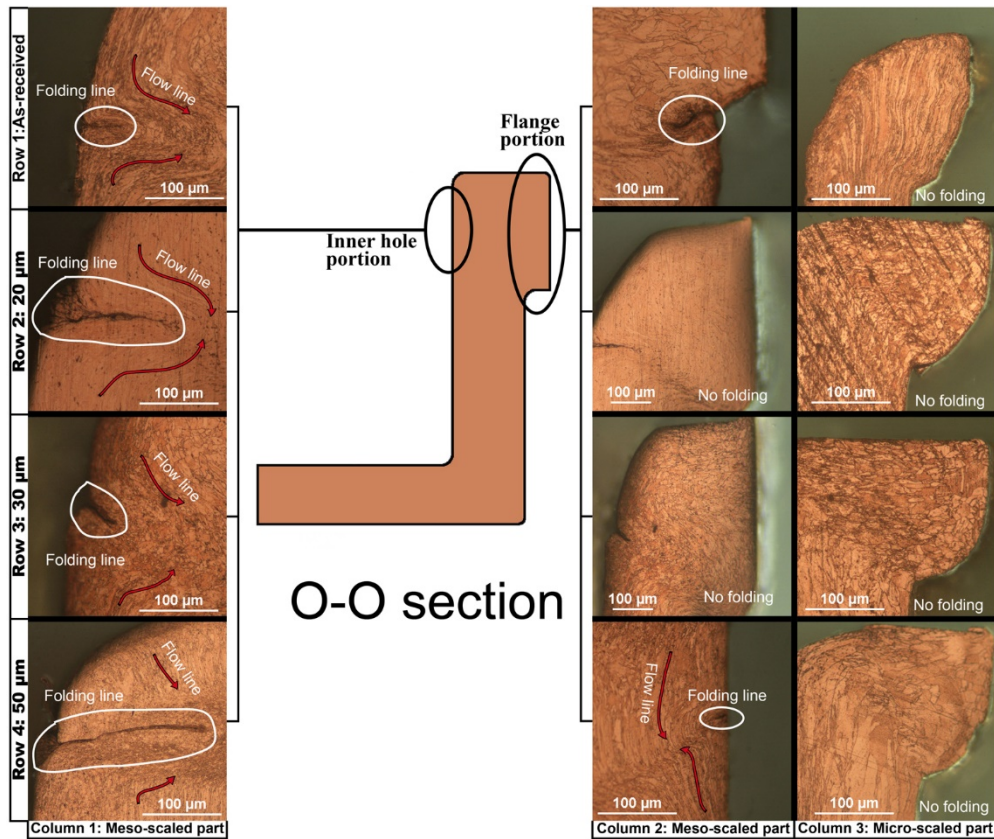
Folding defect formation in the meso- and μ -scale formed parts with different grain sizes [47].
